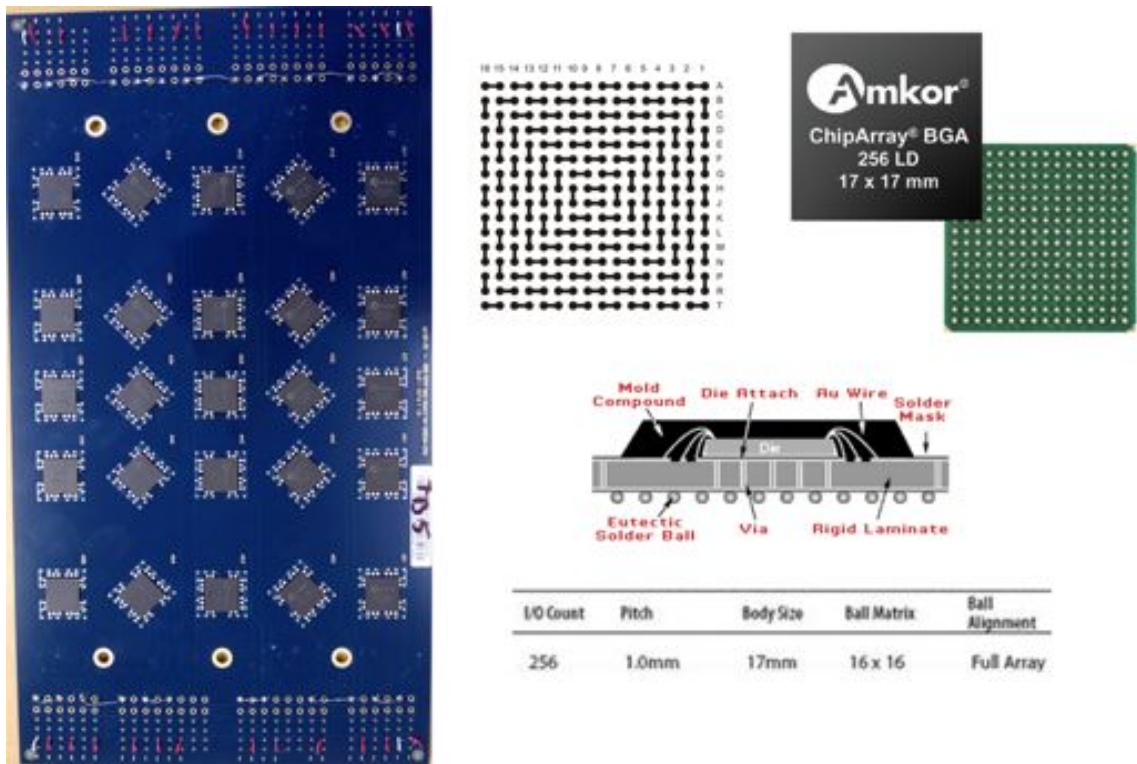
HETB-03 test board and used Amkor CABGA256 component.
